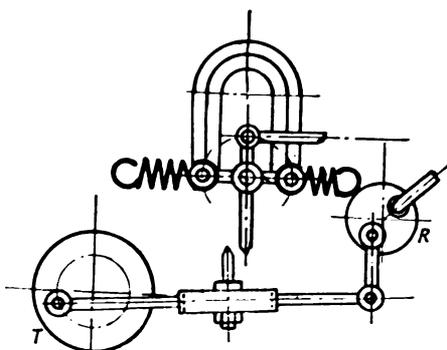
Magneto mechanism, Gasmotoren Fabrik Deutz.
